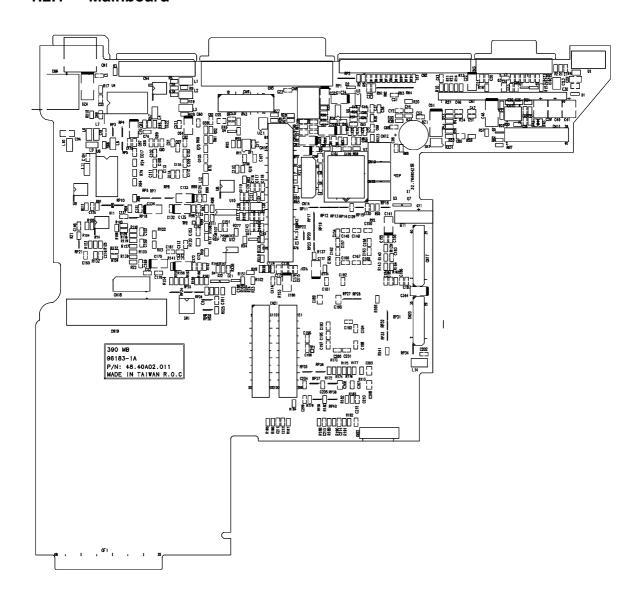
PCB No. 96183-1A Mainboard Layout (Top)
